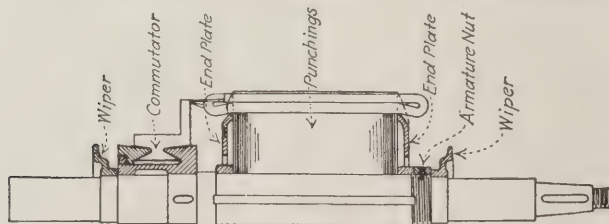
IRON BUILT ON SHAFT SHOULDER BETWEEN COMMUTATOR AND CORE
